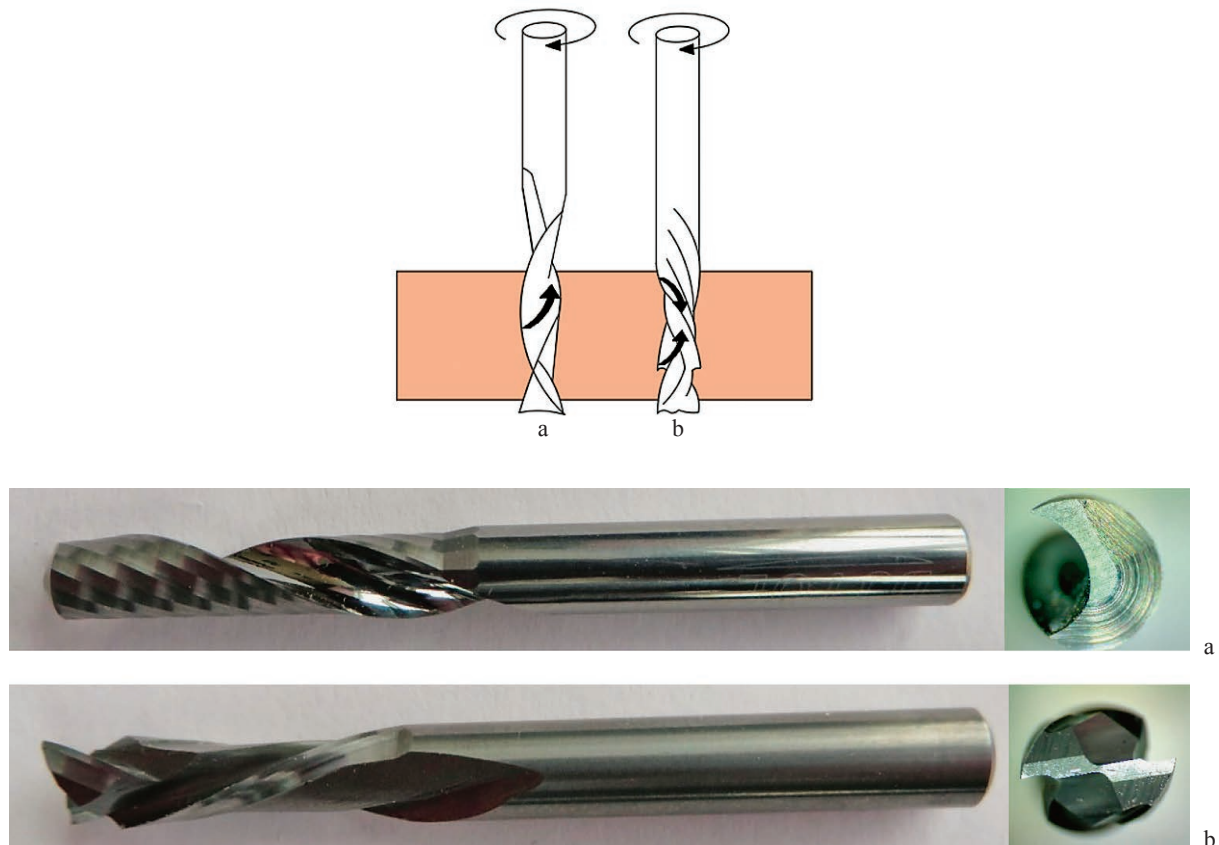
Cutter types: a) Carbide upcut milling cutter, discharges chips upwards b) Carbide compression (positive-negative) milling cutter, discharges chips from both the top and bottom
